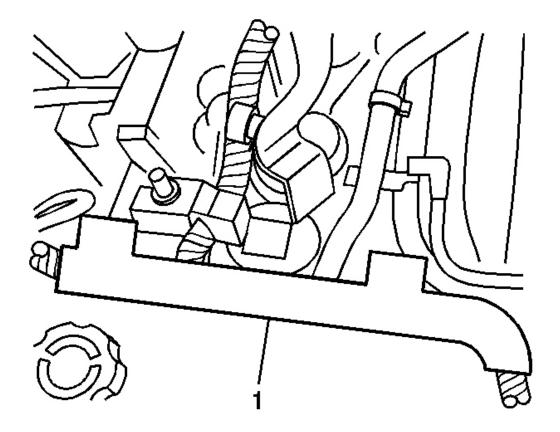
View Of Engine Electrical Harness Housing Courtesy of GENERAL MOTORS CORP.
